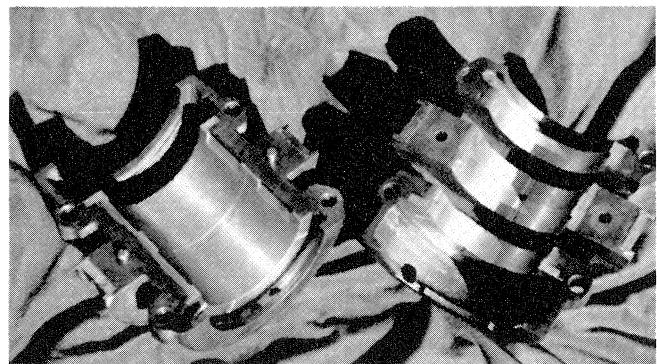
Original Oil Ring Lubricated Plain Journal Bearings.
